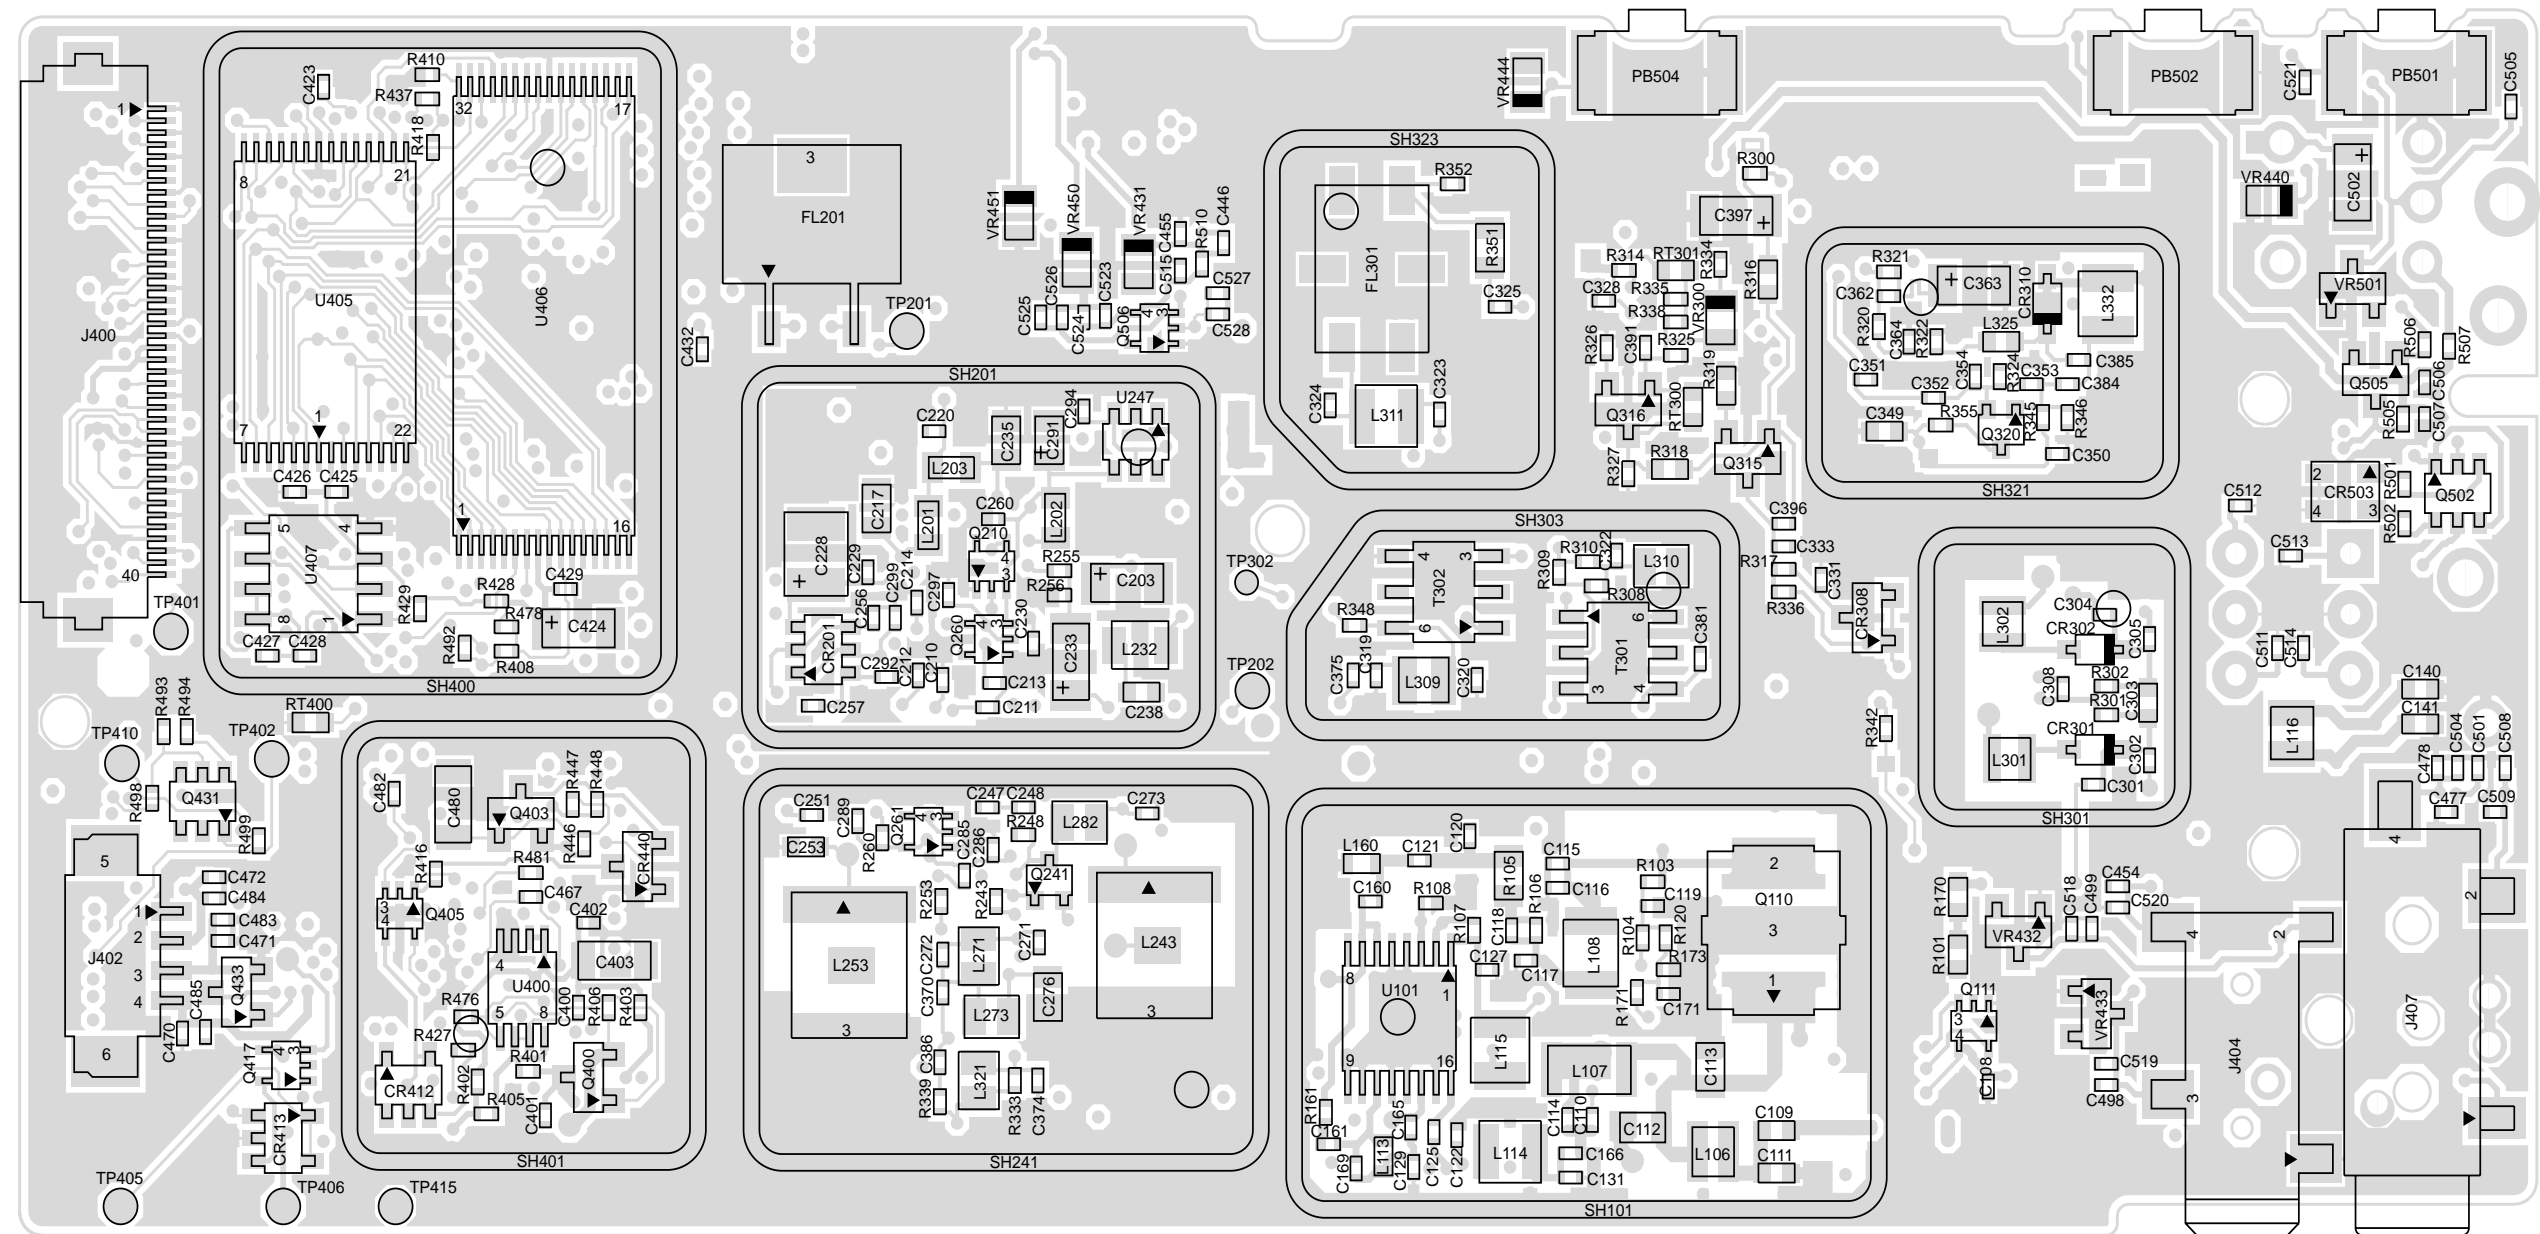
UHF (450-527 MHz) Main Board Top Side PCB
